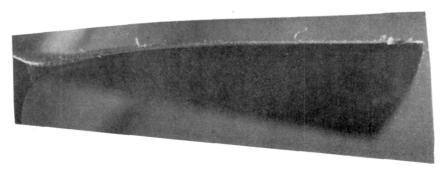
FRACTURE SURFACES OF BOTH FAILED BLADES. CRACK PROGRESSION WAS IN FATIGUE OVER 85% OF THE SURFACE. MAGNIFICATION: 9X
